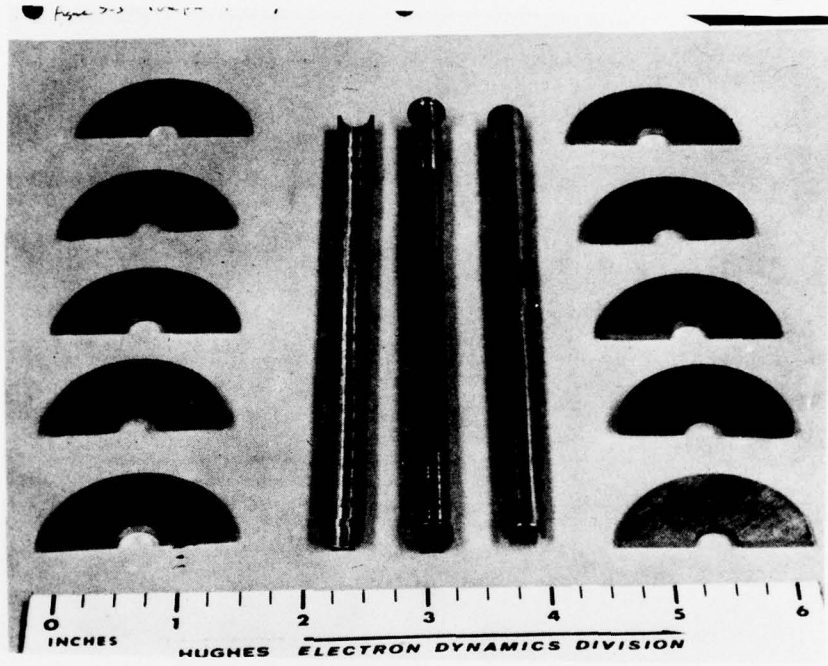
POLE PIECES, MAGNETS, FERRULE AND SPACER ASSEMBLIES.
